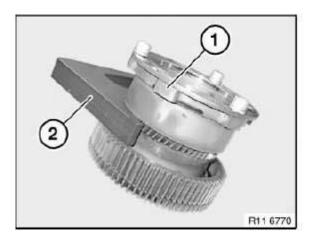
Identifying VANOS Gear And Special Tool Courtesy of BMW OF NORTH AMERICA, INC.
